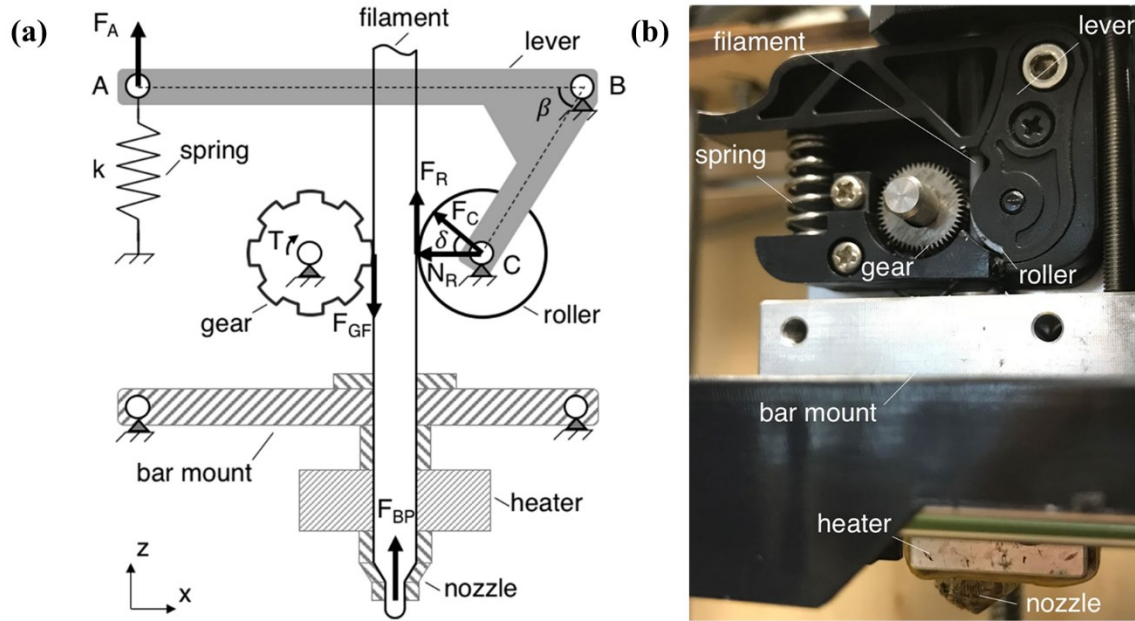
(a) The detailed schematic of the direct drive FDM extruder head. (b) The photo view of the common direct drive FDM extruder head. Reproduced with permission [51].
